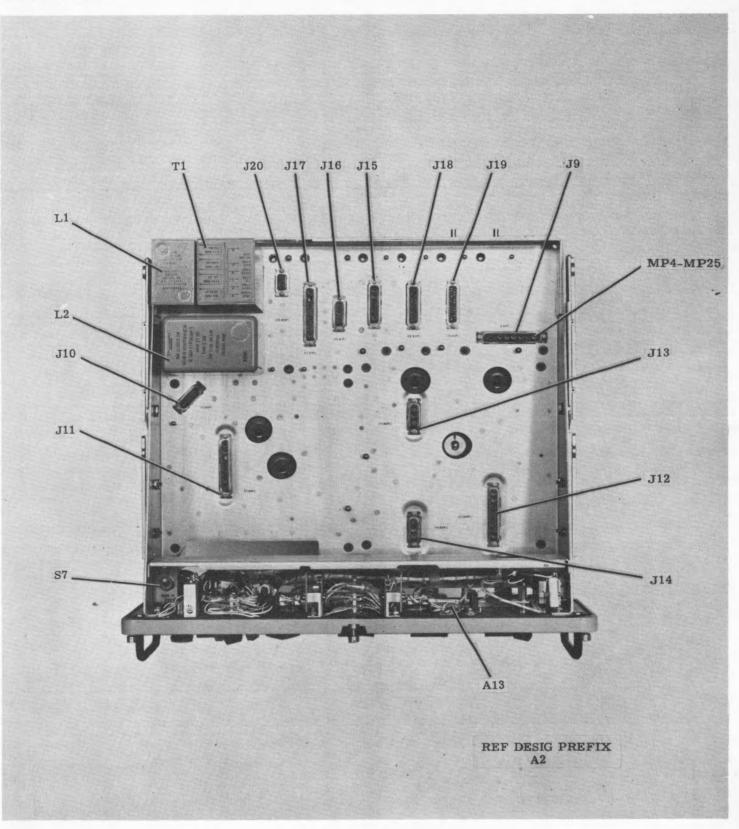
Radio Transmitter T-827/URT, Chassis, Top View
